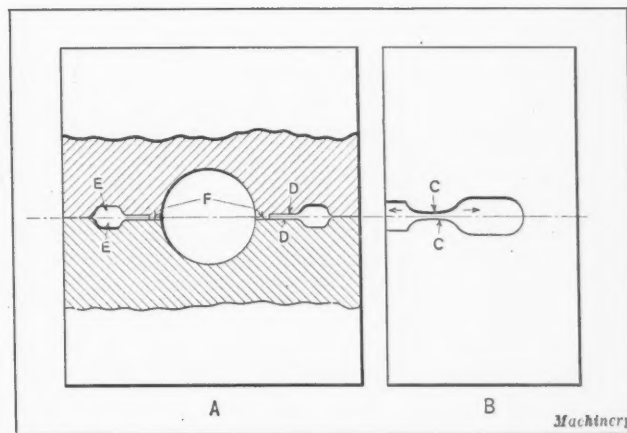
(A) Section from Flash Recess, (B) Side View of Fuller
